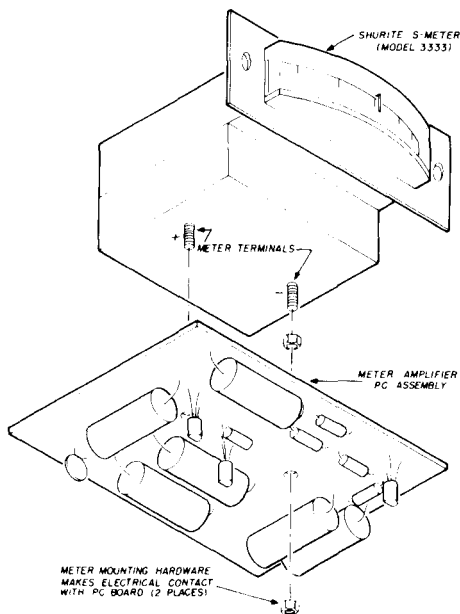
Construction of the 5-mA S-meter circuit shown in fig. 4. Printed-circuit layout is shown in fig. 7.
